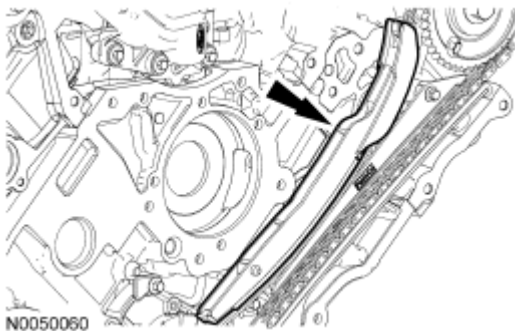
Locating LH Primary Timing Chain Tensioner Arm
